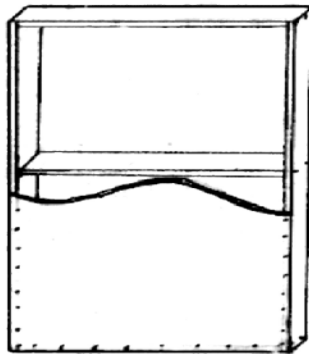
Construction of a typical hard flat. 1 inch lumber is used for frame and 1/4 inch plywood is used to cover it.
